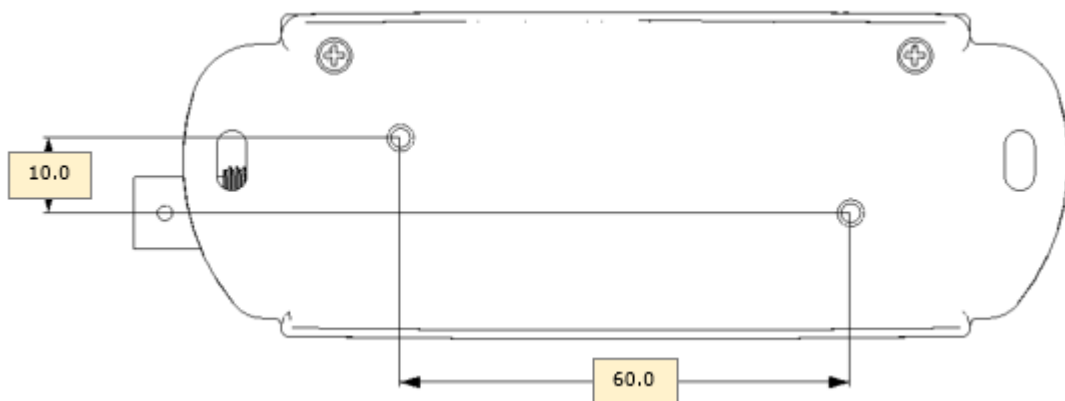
LDSBus ORP Sensor Adapter Dimension – Bottom View
